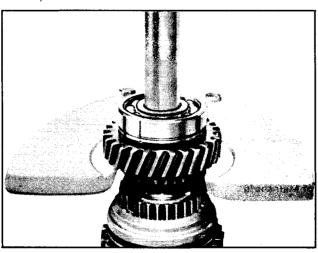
A-24 Removing Rear Bearing and Reverse Gear
